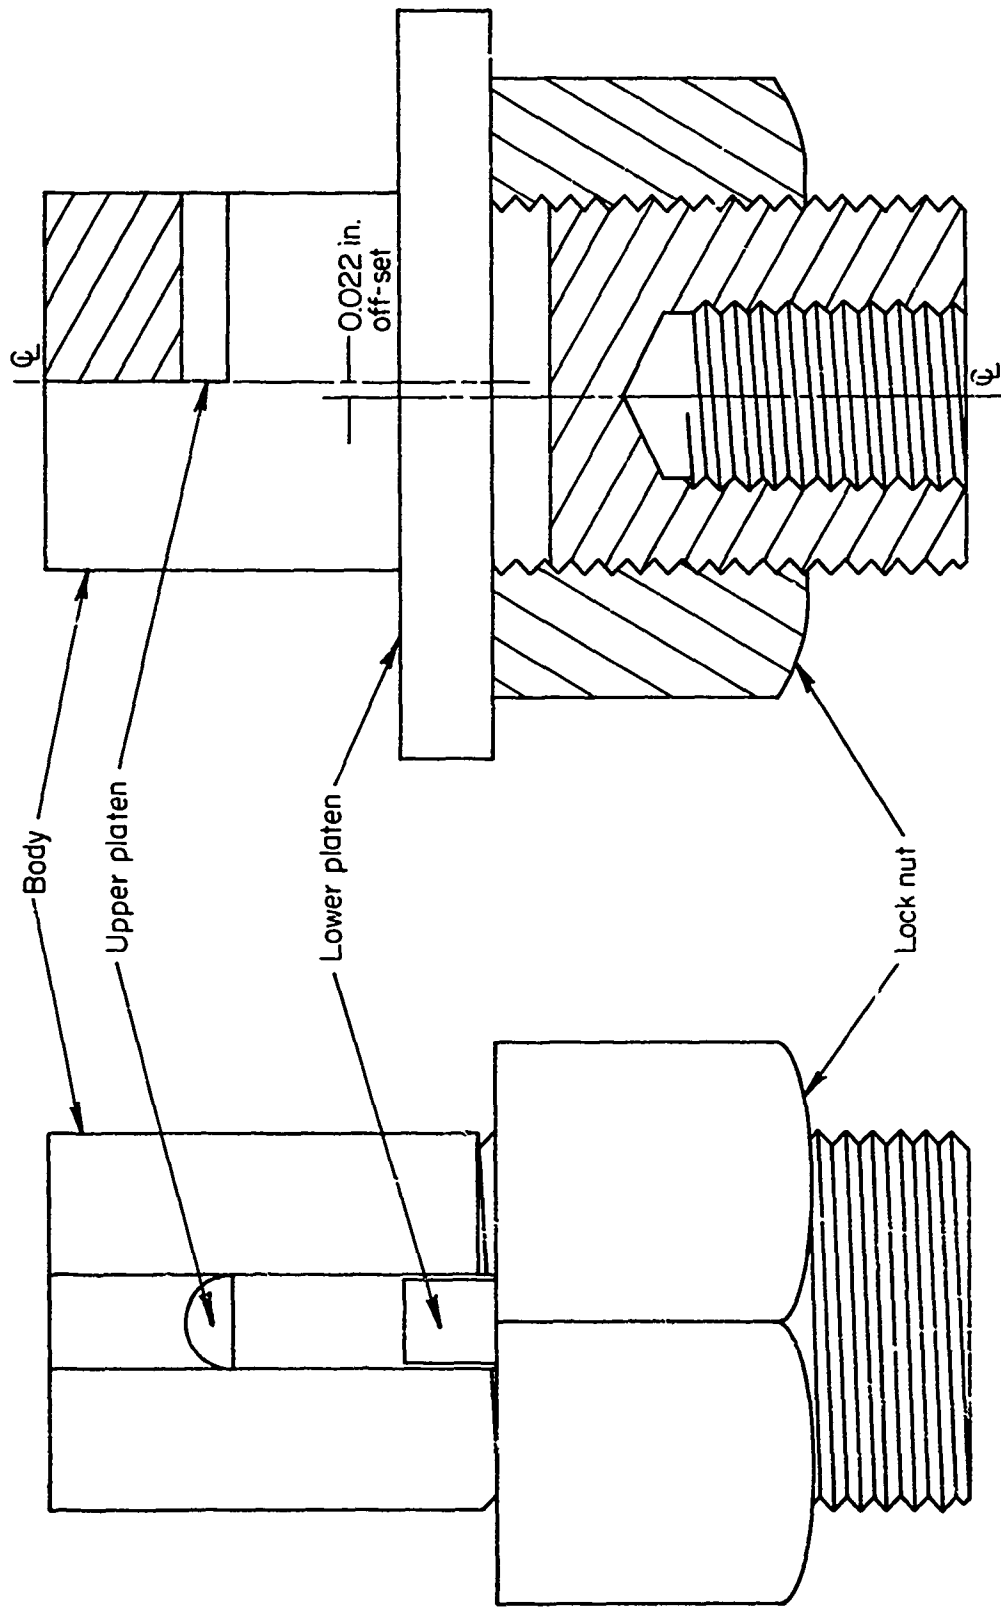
GRIP ASSEMBLY FOR TENSILE TESTING TUBE-TO-PLATE WELD JOINTS
